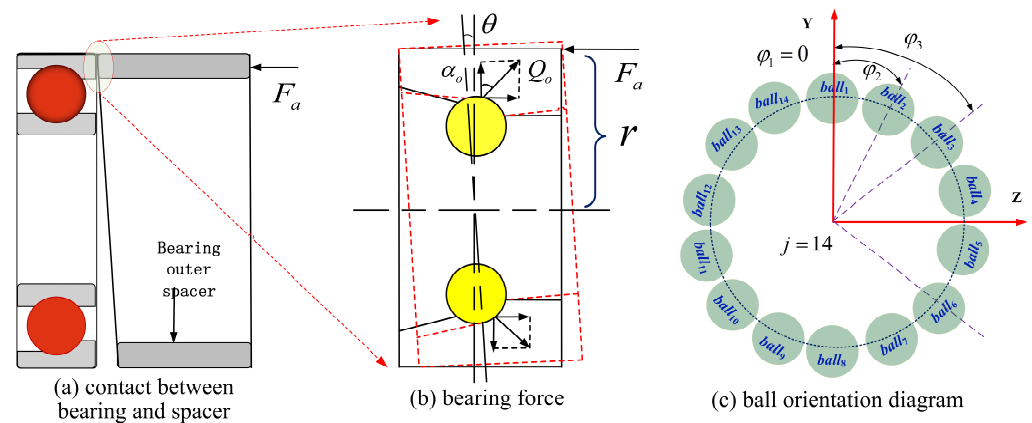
Force analysis diagram of bearing outer ring under inclined spacer ring: (a) contact between bearing and spacer, (b) bearing force, (c) ball orientation diagram.
